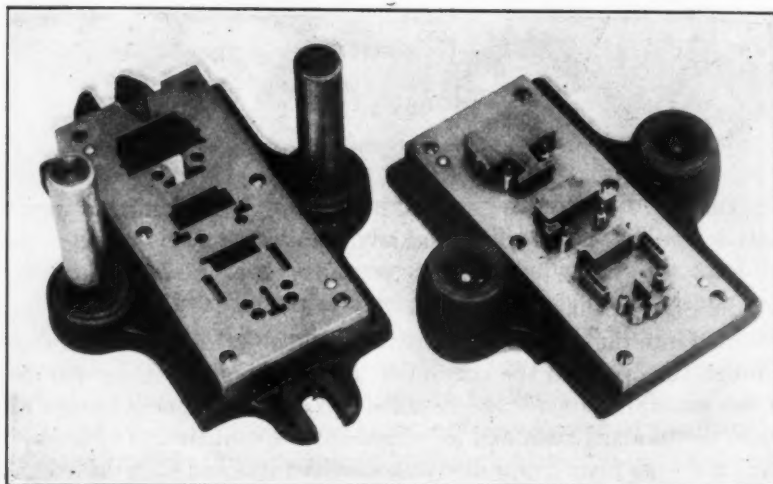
THREE-STEP PROGRESSIVE BLANKING DIE FOR 51 I
